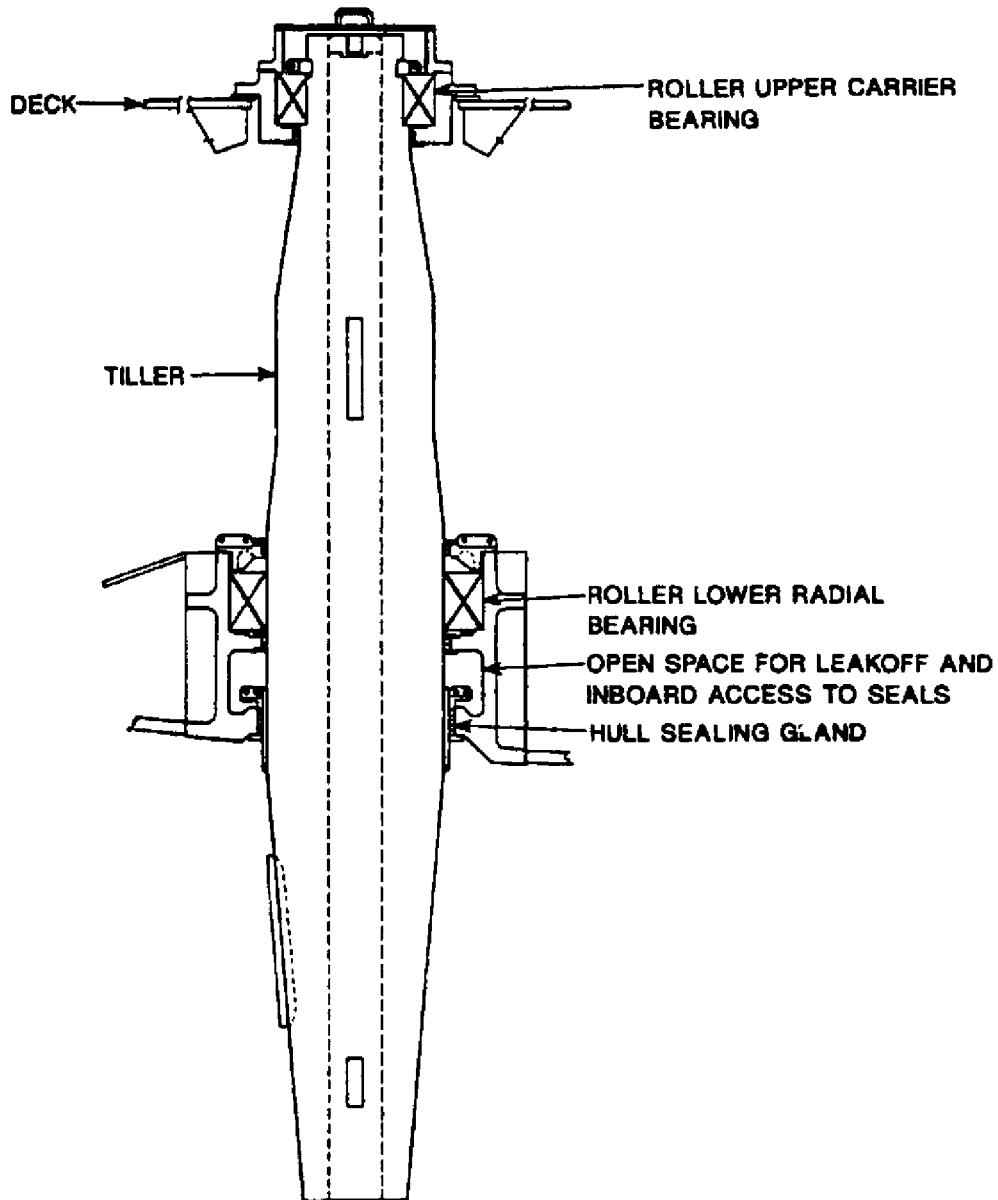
New Roller Bearing Arrangement of Rudder Stock Bearings
